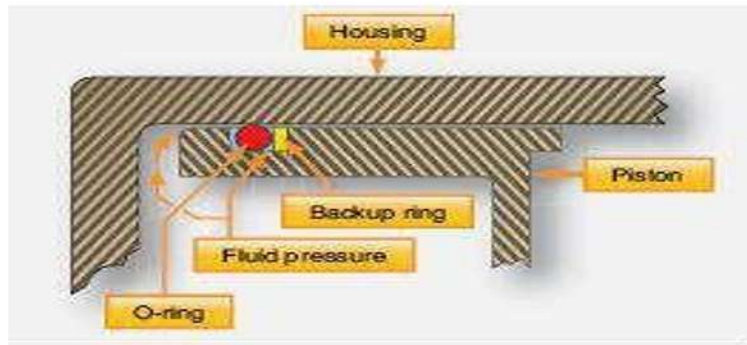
Back-up rings are used to keep O-rings from extruding into the space between the piston and the cylinder. They are positioned on the side of the O-ring away from the fluid pressure.
